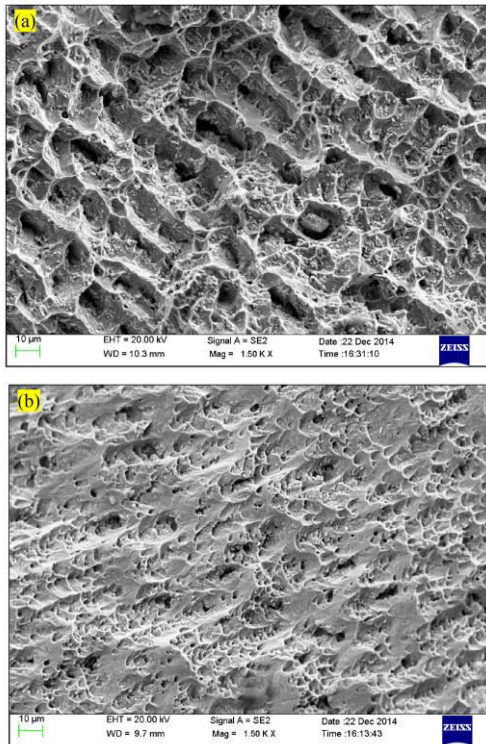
SEM fractographs on the impact tested samples of (a) ER 2553 (b) ERNiCrMo-4 weldments.
